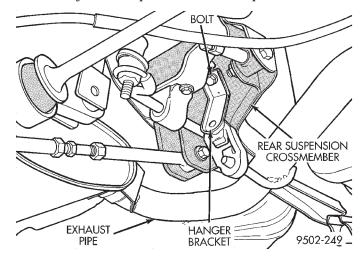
Exhaust Pipe Hanger At Rear Suspension Crossmember
